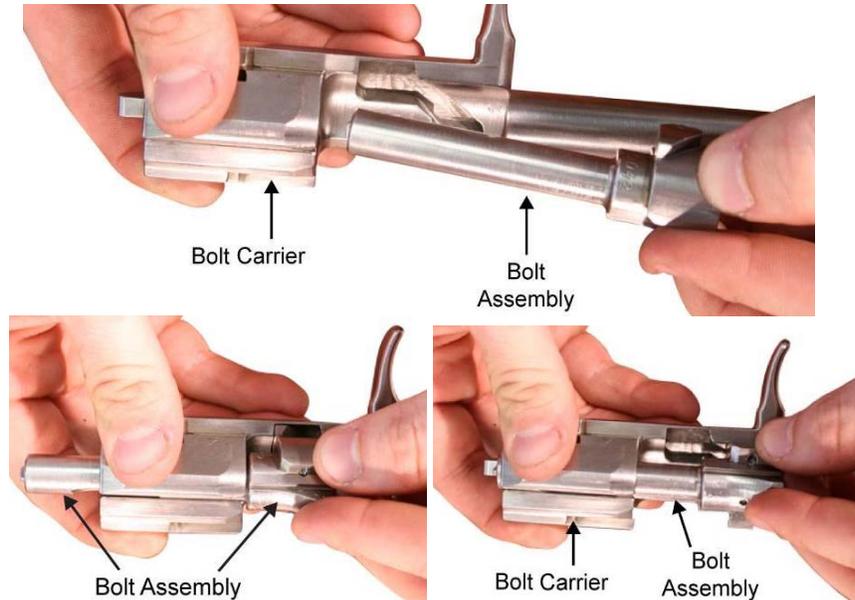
Installing the Bolt Assembly into the Bolt Carrier.
